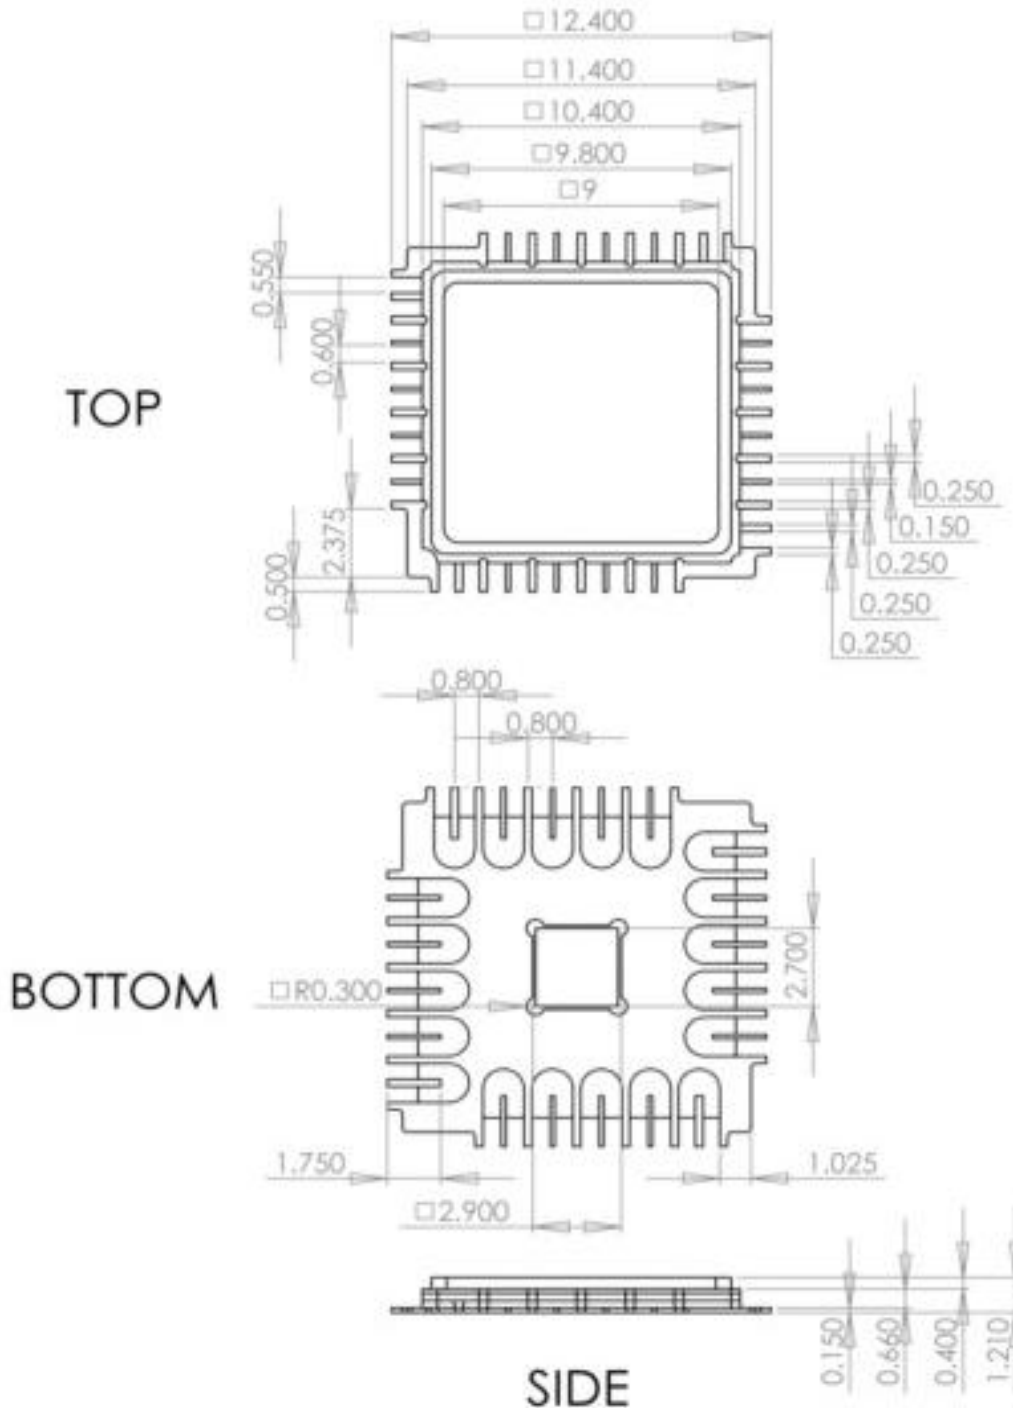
CQFP 44-Pin Package Drawing (All Dimensions in mm)
